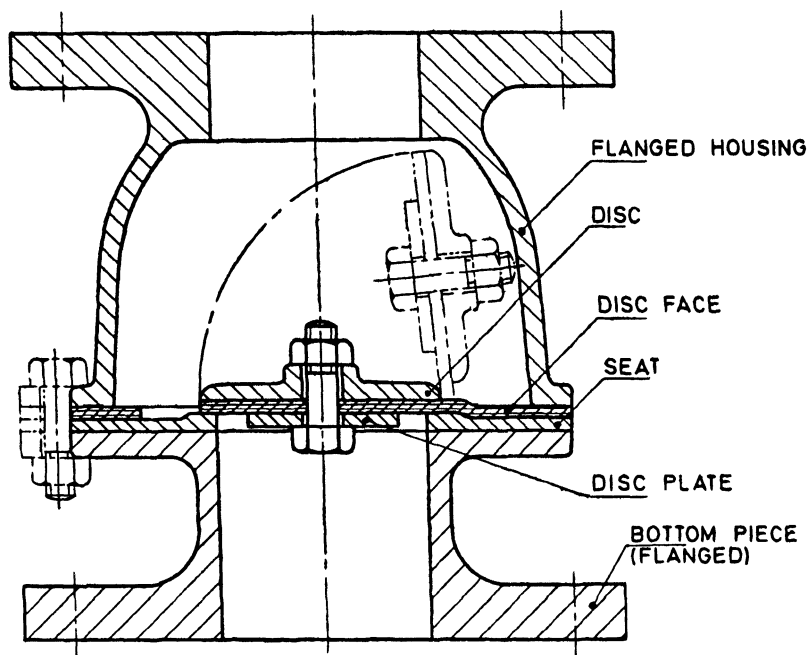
B TYPICAL SECTIONAL DRAWING OF FLANGED REFLUX VALVE TO BE USED IN SUCTION LINE OF AGRICULTURAL PUMP
